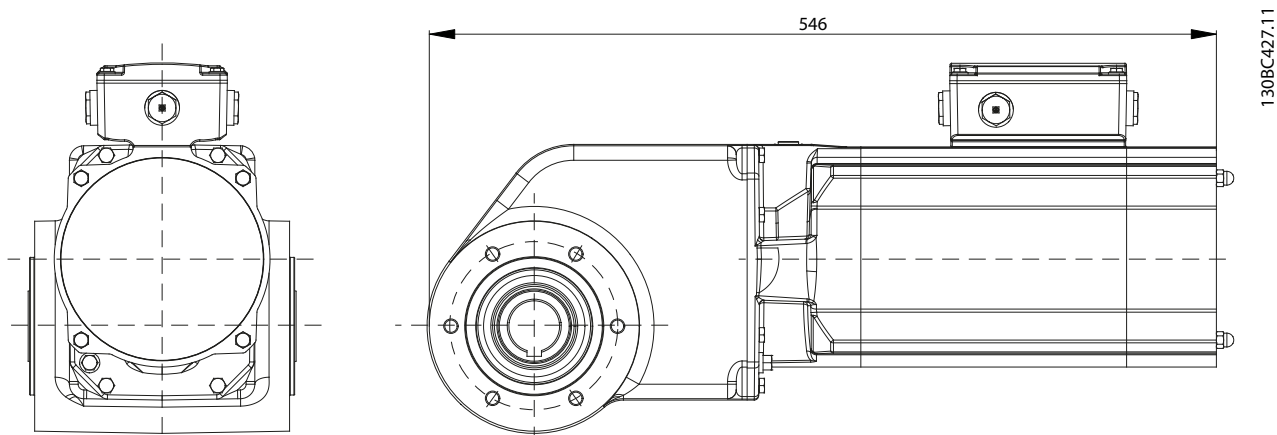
Dimensions: OneGearDrive with Mechanical Brake Option
